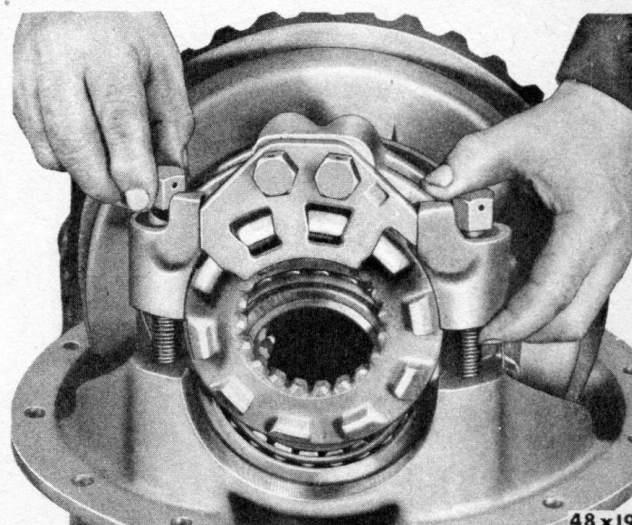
Removing or Installing Bearing Cap, Adjuster and Lock Assembly
